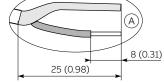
Signal Cable Part No. D173D031U01, Dimensions in inch (mm)
